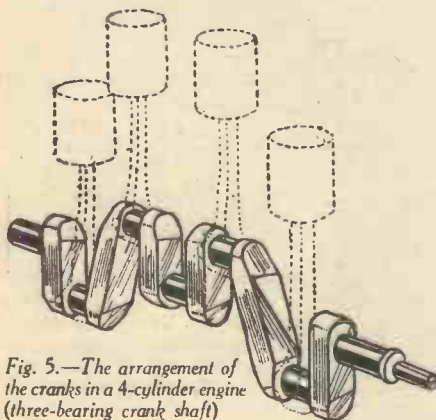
The arrangement of the cranks in a 4-cylinder engine (three-bearing crank shaft)
